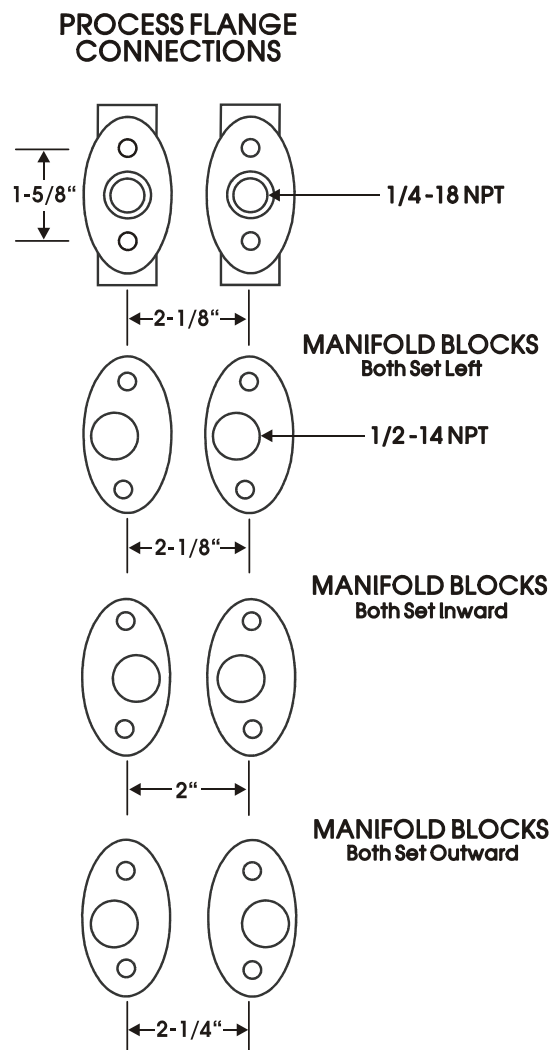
Process Flange and Optional Manifold Block Connectors
